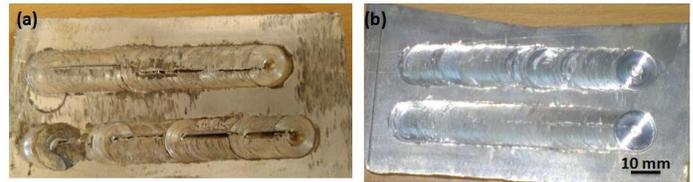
Photographs of FSPed AZ31 sheets: (a) 1400 rpm tool rotational speed and 25 mm/ min tool feed and (b) 1400 rpm tool rotational speed and 20 mm/ min tool feed.
